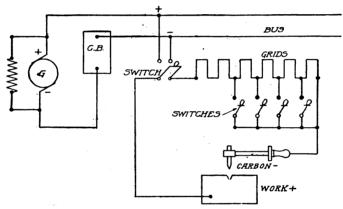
Wiring Diagram for Lincoln Arc Welder
